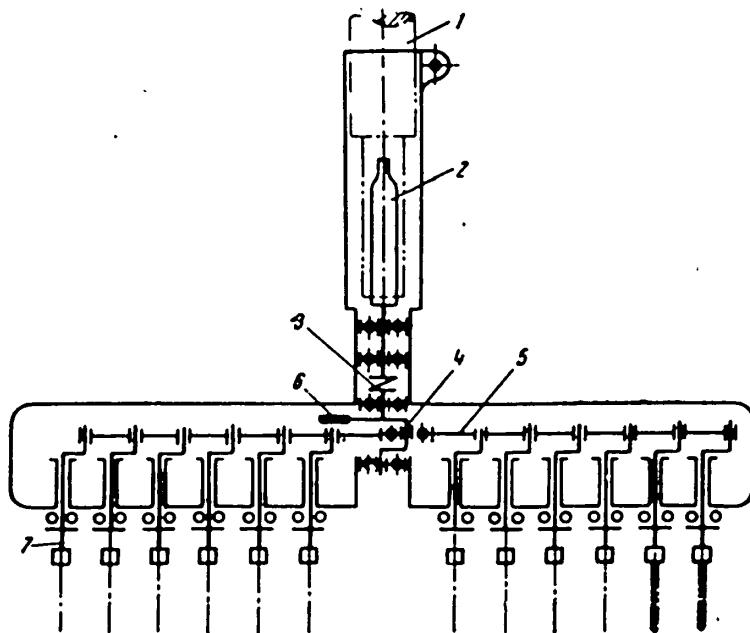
Kinematic Diagram of a Twelve-Spindle Drill Head
